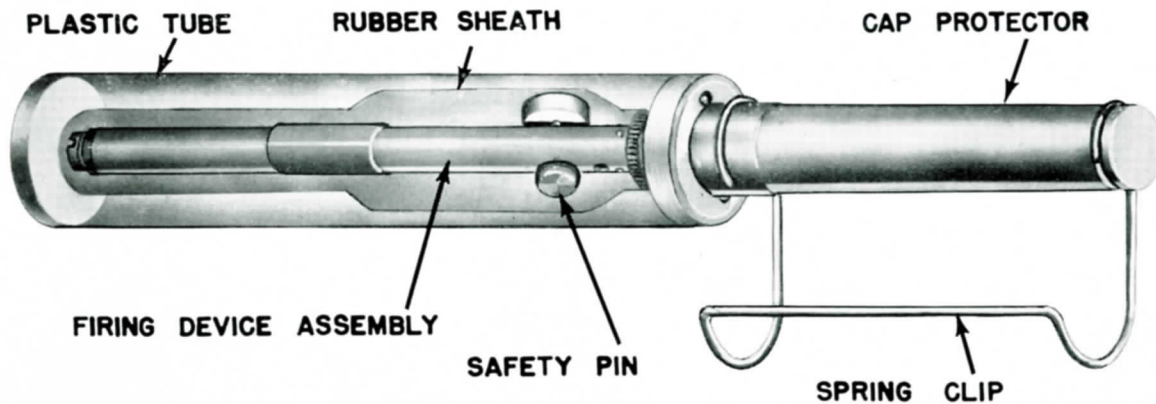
Phantom view showing firing device assembly in transportation tube.
